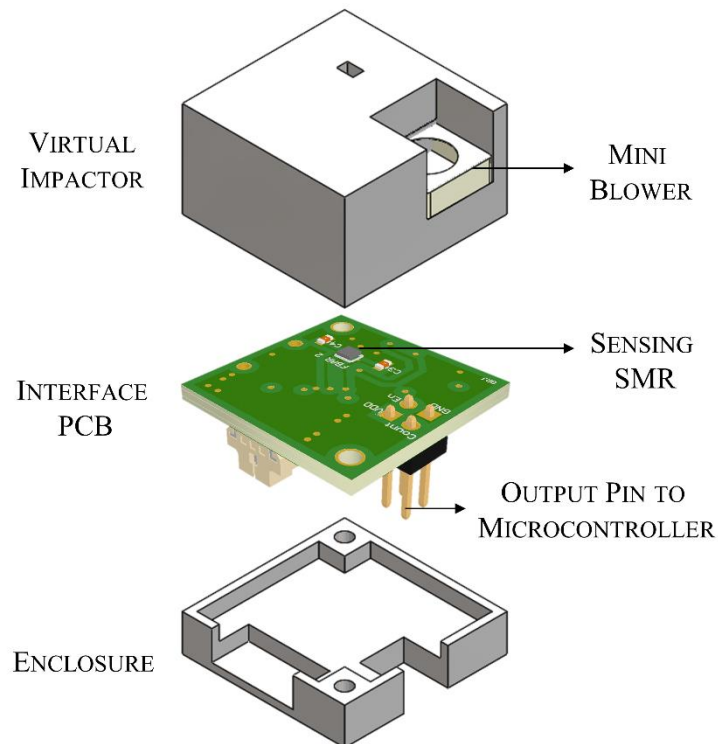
Exploded drawing of particle sensing system with overall dimensions of 22 mm \times 22 mm.
